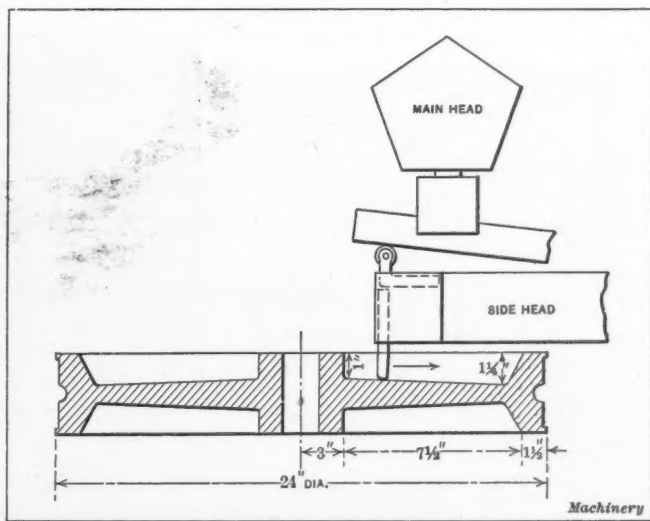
Set-up on a Bullard Vertical Turret Lathe for machining a Beveled Surface on a Machine Steel Disk. For "Productograph" Record, see Fig. 5
